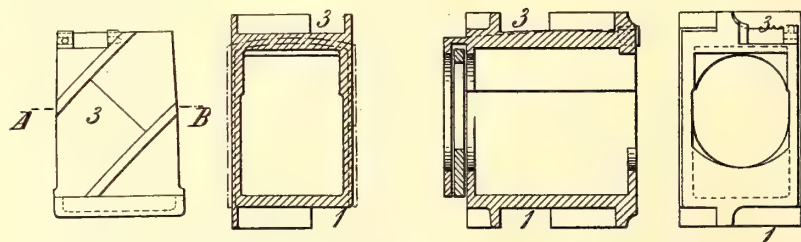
PLAN, SECTION ON *A B*, LONGITUDINAL SECTION AND FRONT ELEVATION OF INNER AXLE-BOX
